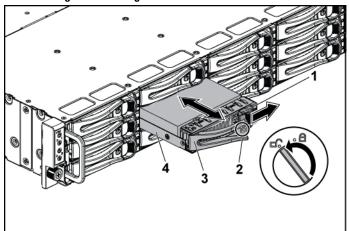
Removing and Installing a Hard-Drive Carrier
